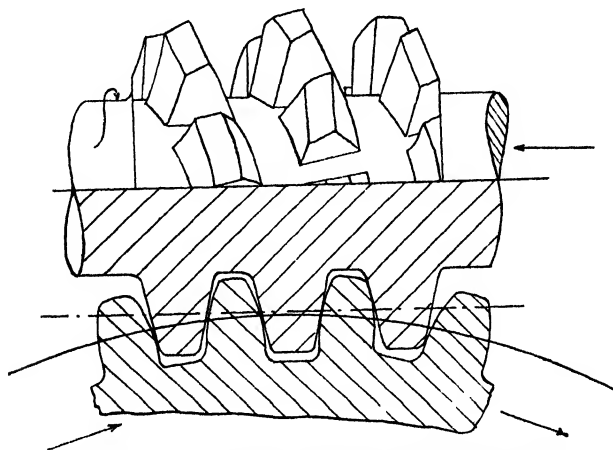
Cutting Worm Wheel, using a Parallel Hob.
